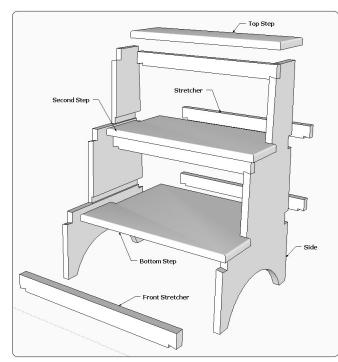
The step stool has only six unique components. Shaping the front stretcher illustrates how to handle pieces at an angle.
